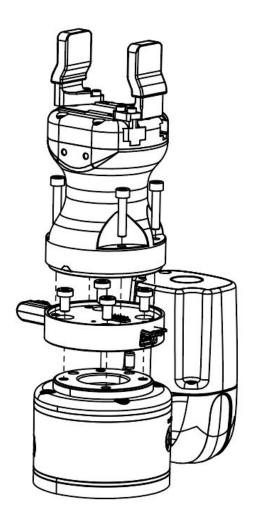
Mechanical installation of the I/O Coupling and the Hand-E Gripper
